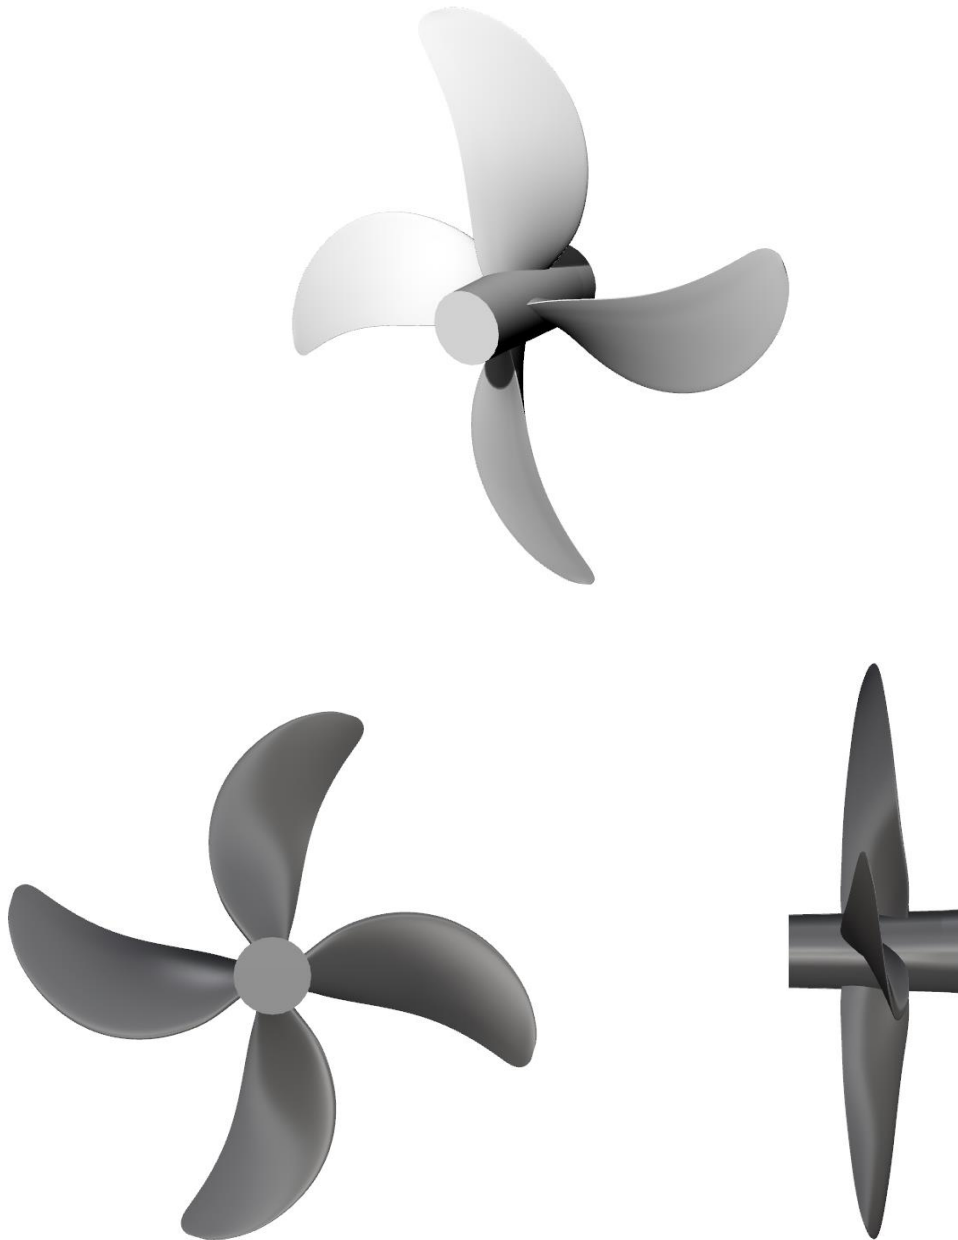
1 : Propeller geometry in perspective view (top) , front view (left) and side view (right)
